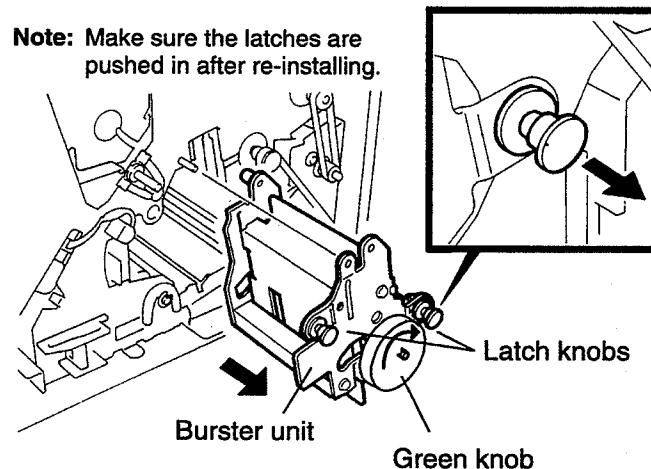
REMOVING THE BURSTER UNIT.
